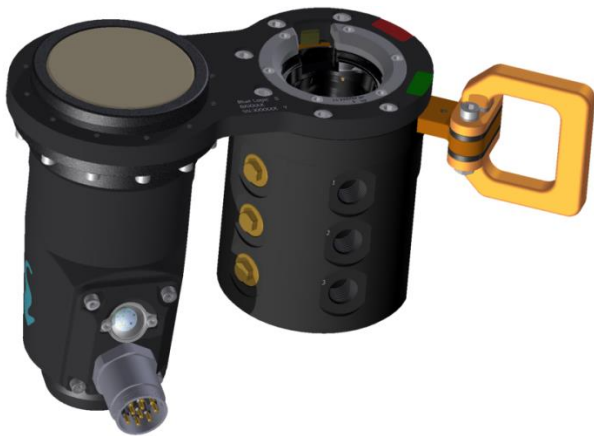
Subsea-USB installed on a 3-Port Valve Stab receptacle. Illustration picture.
